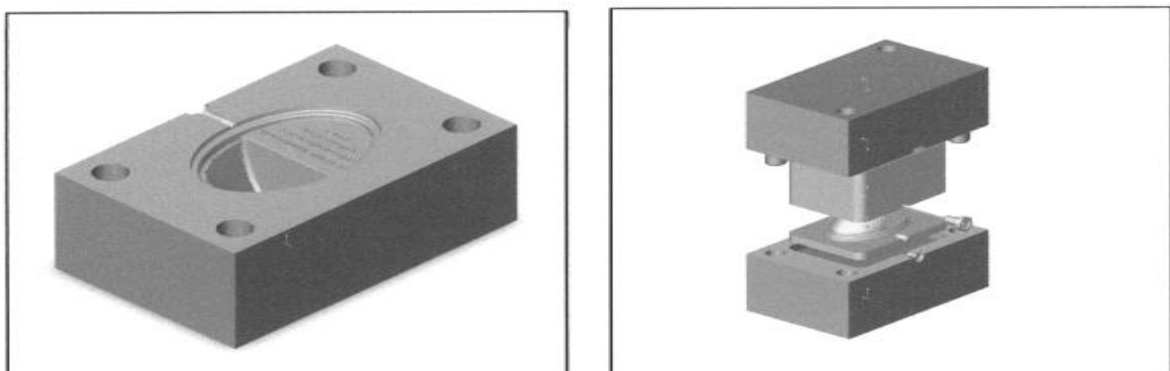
Mould tool design of mould (female) and total tooling for Millennium Bridge
